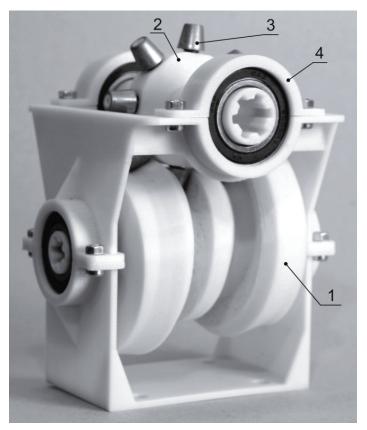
The gear demonstrator – the prototype; 1– worm, 2 – body worm wheel, 3 – rotary tooth, 4 – frame
